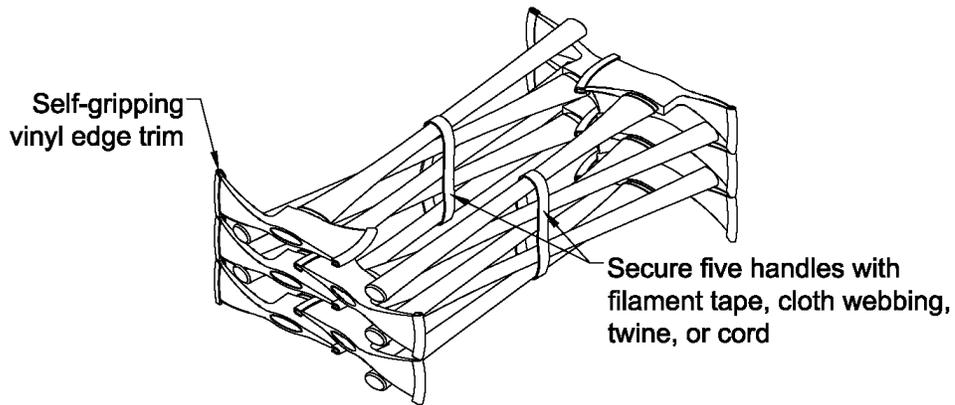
Securing and packaging of ten Pulaski tools for shipping.
